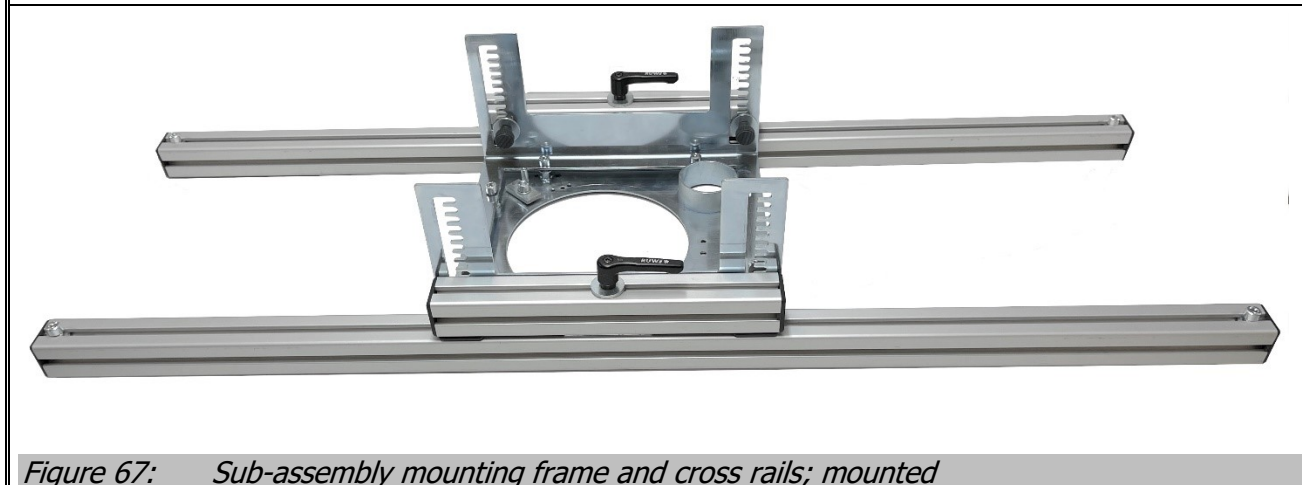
Sub-assembly mounting frame and cross rails; mounted
